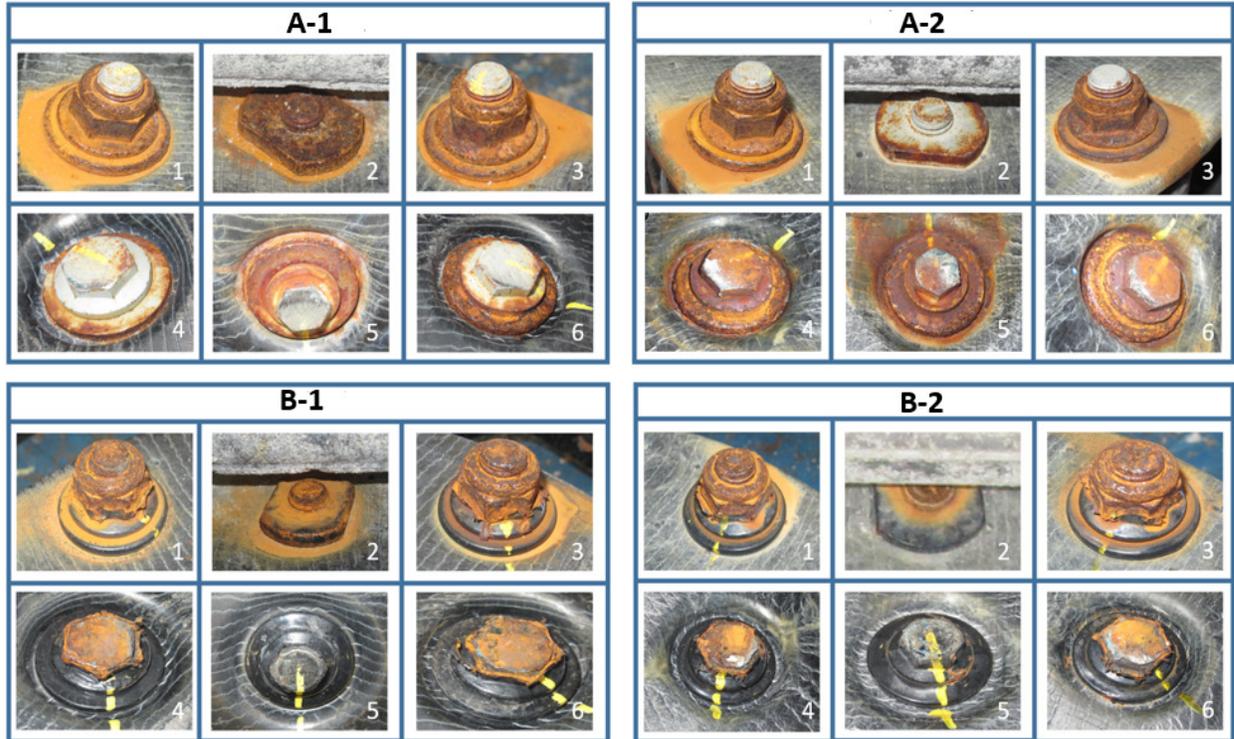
fasteners after 12 week laboratory component cyclic corrosion test
